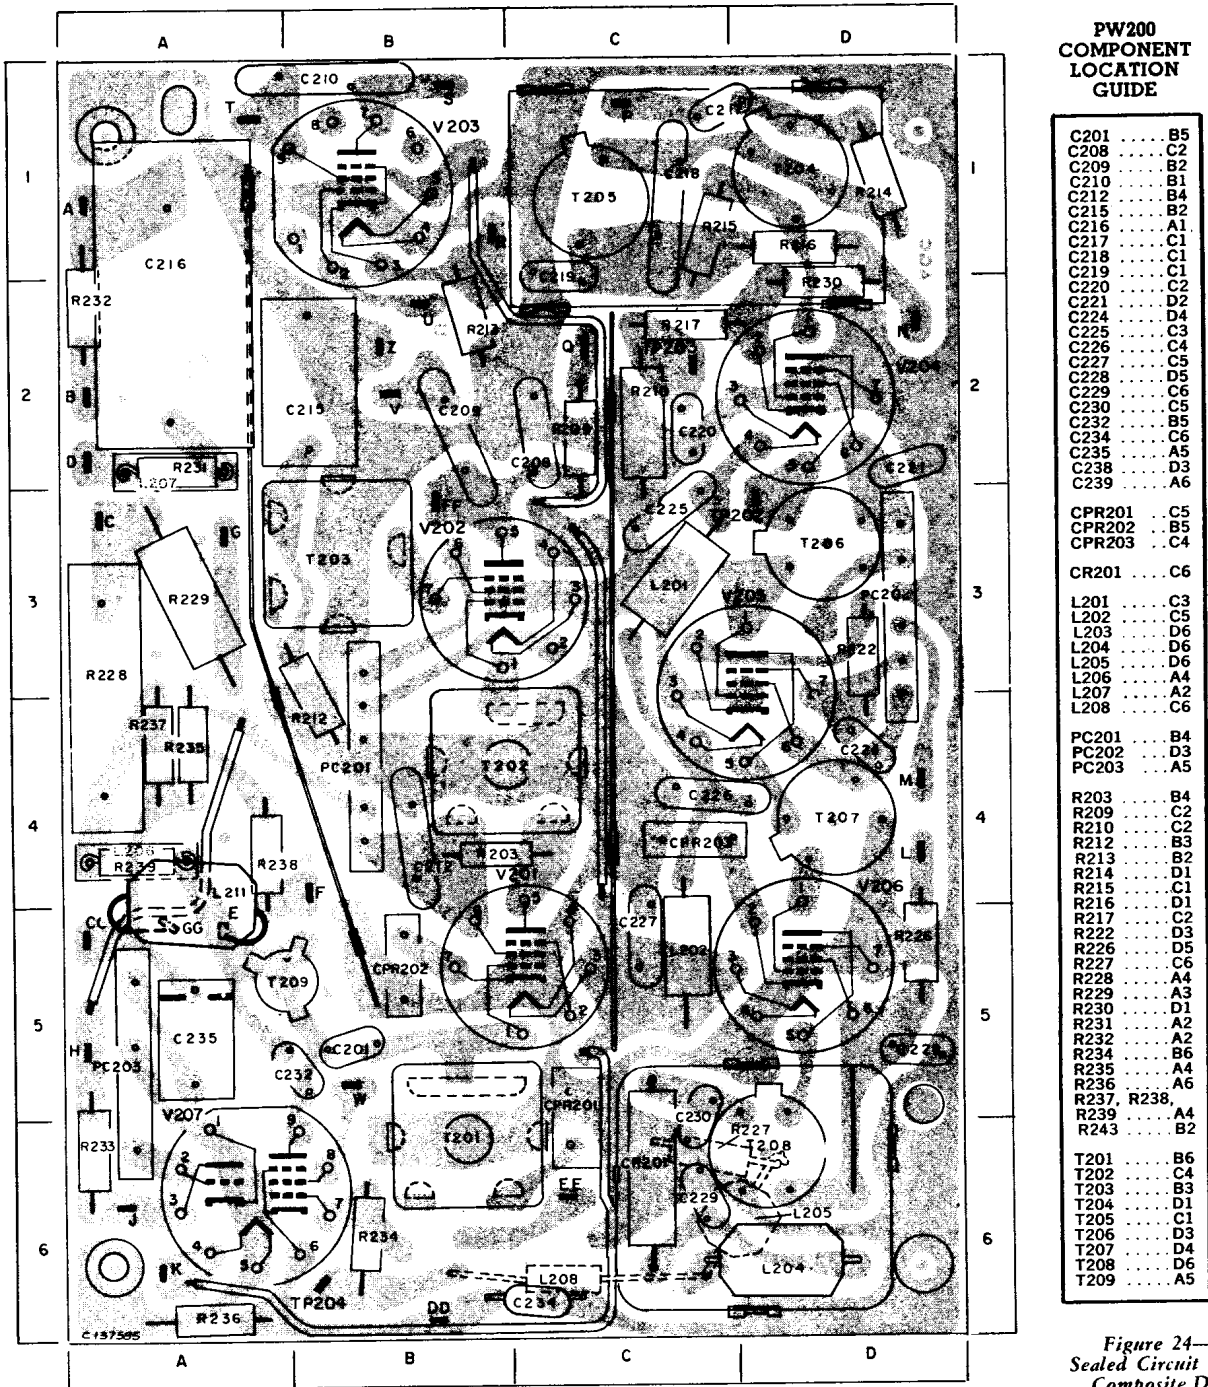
PW200 Sealed Circuit Assembly Composite Diagram
